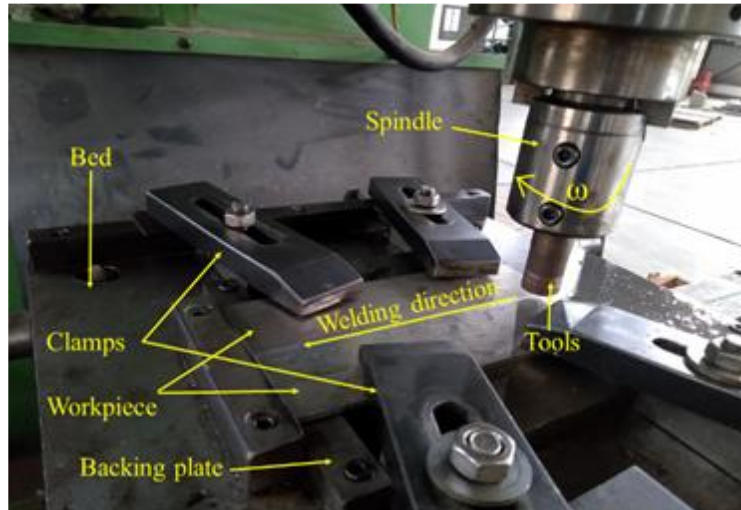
FSW machine with different clamping and backing plate arrangements
